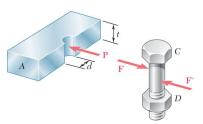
Equal and opposite forces between plate and bolt, exerted over bearing surfaces.
